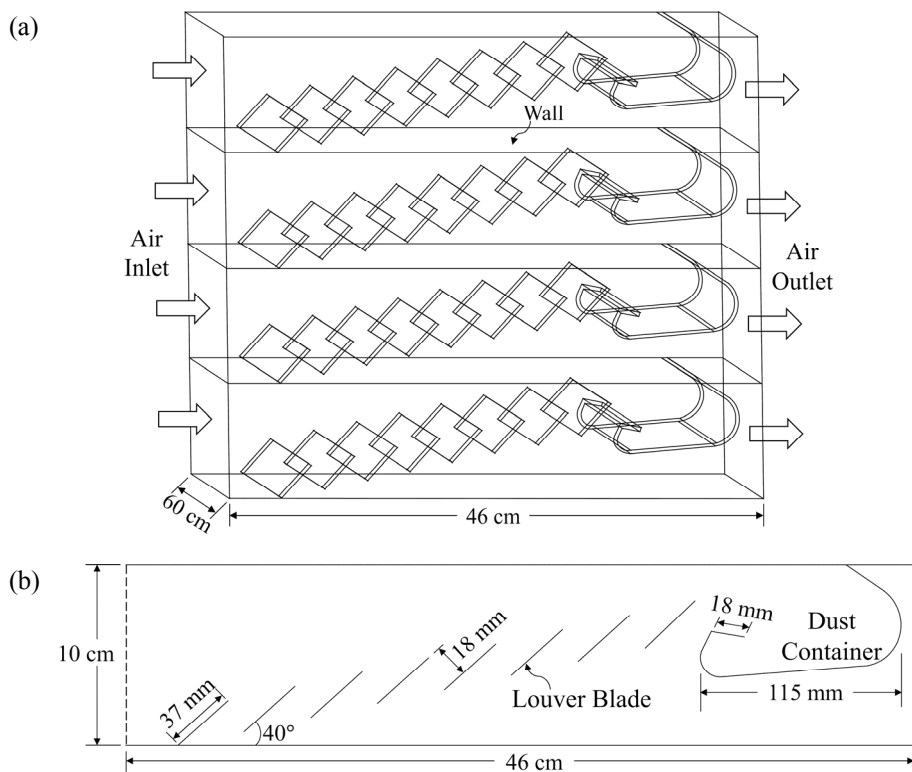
Shape of louver dust collector: (a) Three-dimensional view (b) Side view and detailed dimensions.
